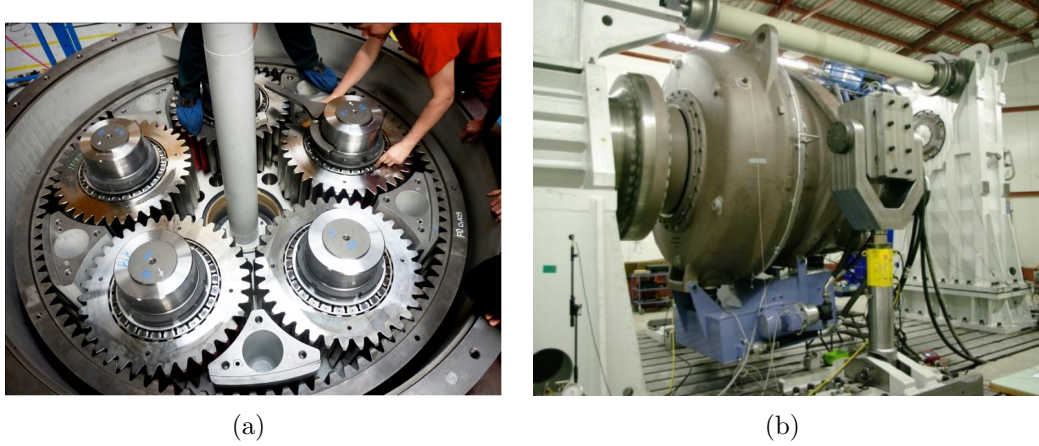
(a) FC5500 stage 2 planets being installed before testing and (b) one gear train with hydraulic cylinder attached to external housing reaction arm.
